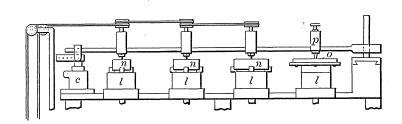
Part Side View, Showing three Milling Tools and a Tracer.
